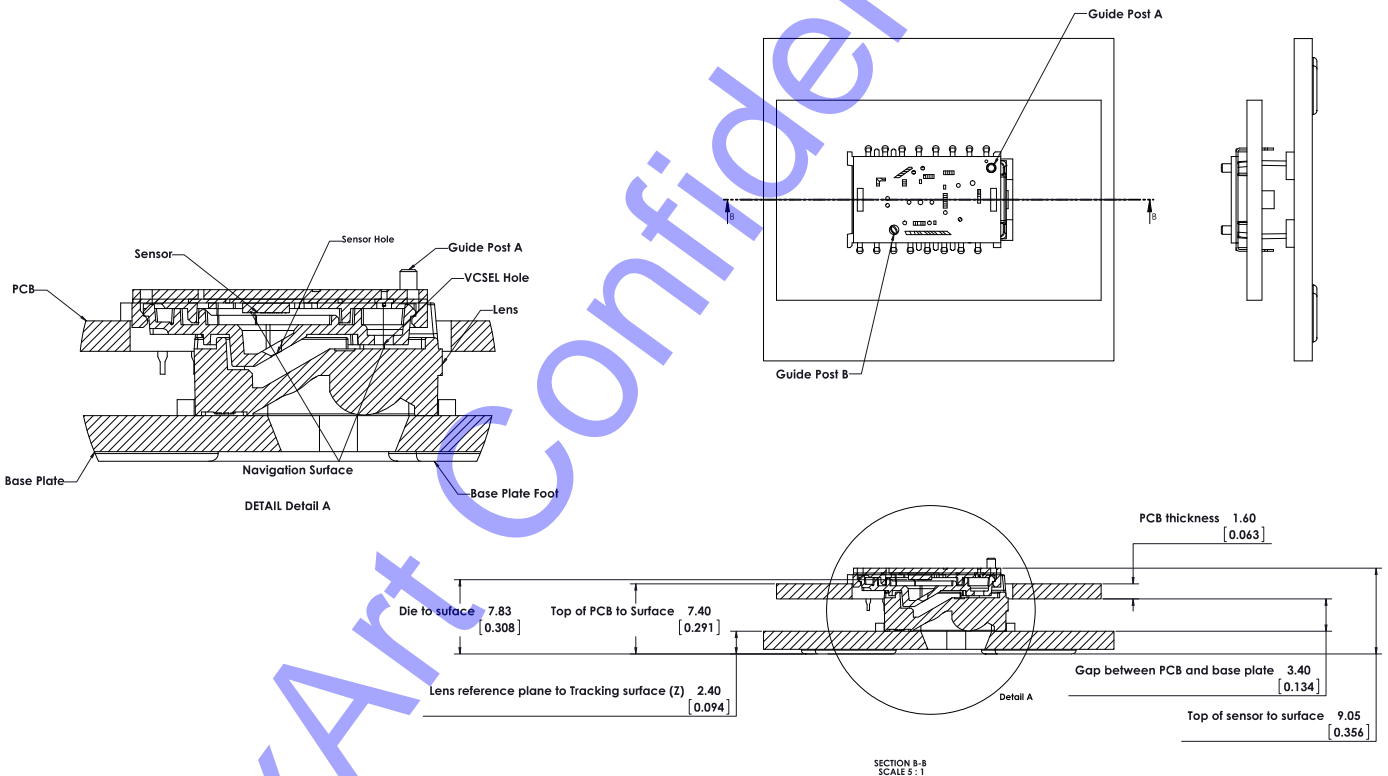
2D Assembly drawing of PMW3610DM-SUDU sensor and LM18-LSI lens coupled with PCB and base plate(top and cross-sectional view)
